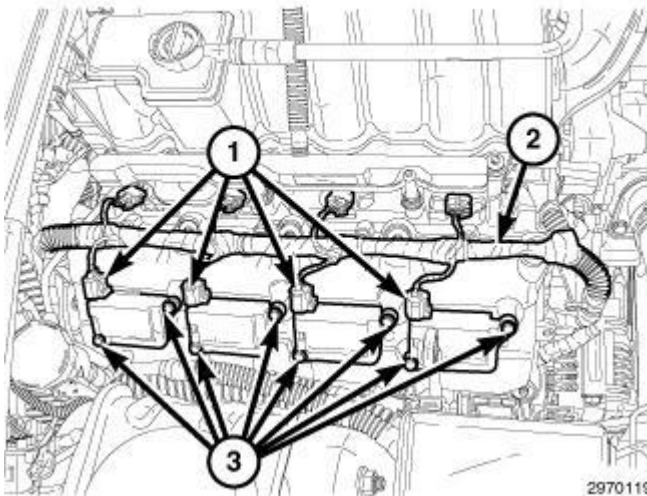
Ignition Coil Electrical Connectors, Harness & Bolts
